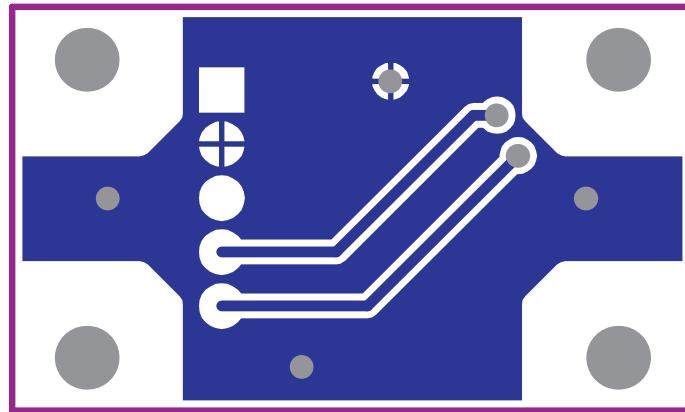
LIS2L02AL sensor board bottom layer.
